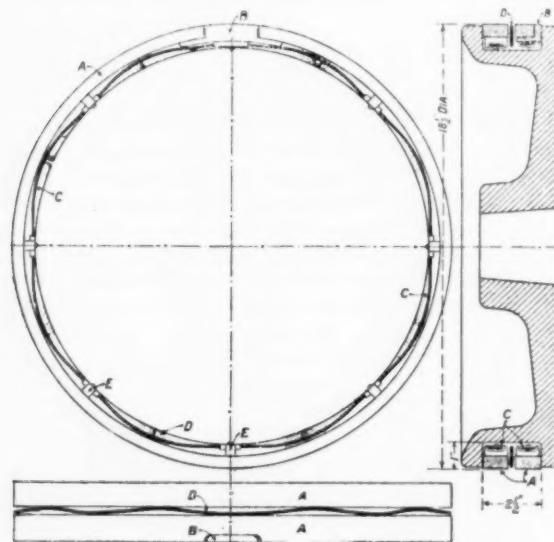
ROWAN LOCOMOTIVE PISTON PACKING RINGS
